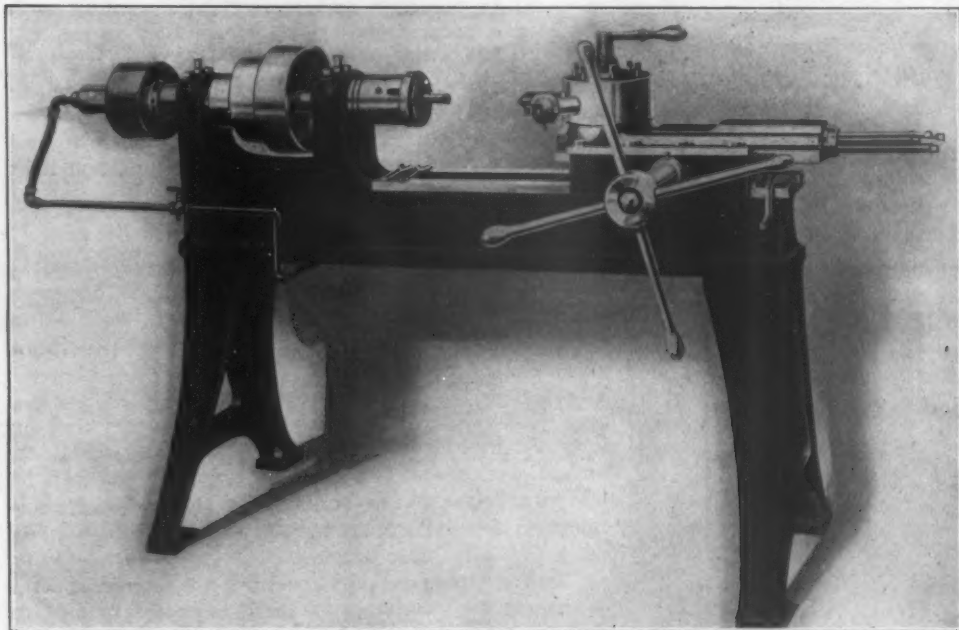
A Lathe Equipped with the Bashlin Four-Hinge Chuck, Made by the Bashlin Tool Works, Grove City, Pa.
